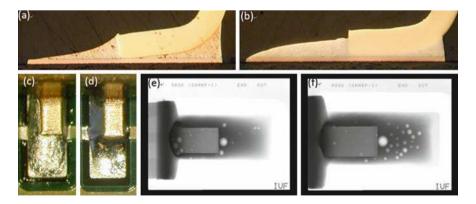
(a) Cross-sectional view of SOP solder joint with Sn–37Pb alloy; (b) Cross-sectional view SOP joint with SAC solder; (c) Top view of joint depicted in (b); (d) Top view of solder joint depicted in (a); (e) X-ray image of SOP solder joint made of Sn–37Pb solder alloy; and (f) X-ray of SOP solder joint made of SAC solder alloy
